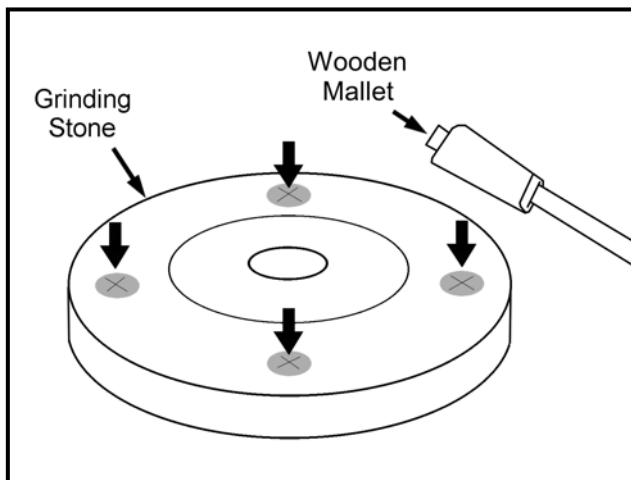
Tapping locations on the grinding stone when inspecting for internal damage
